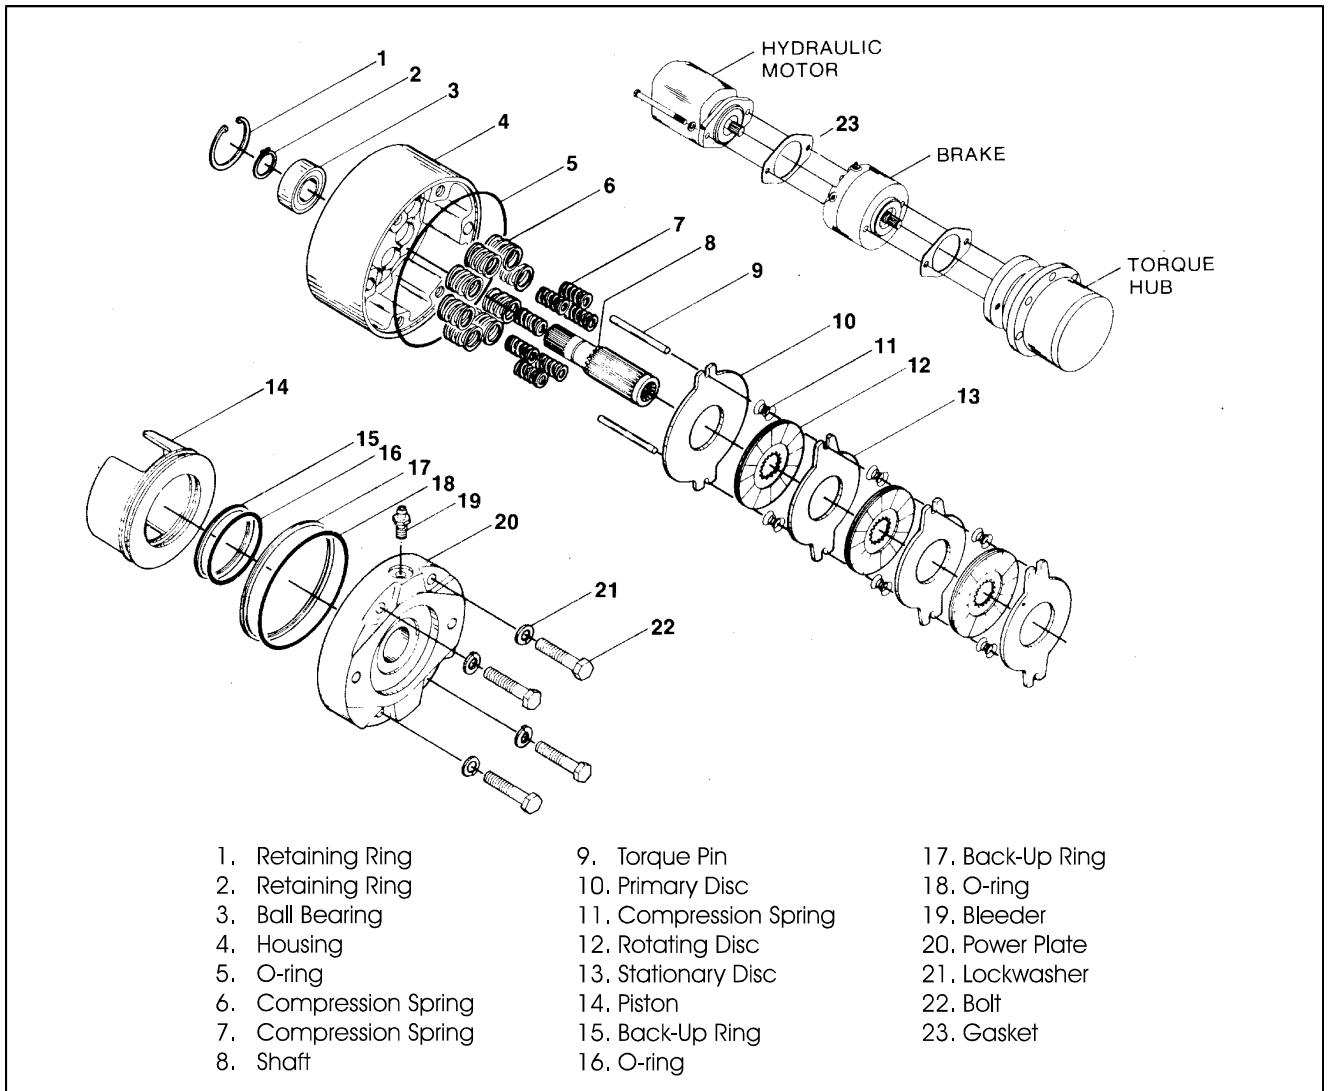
Drive Brake, Ausco - Machines Built Prior to October 1987
